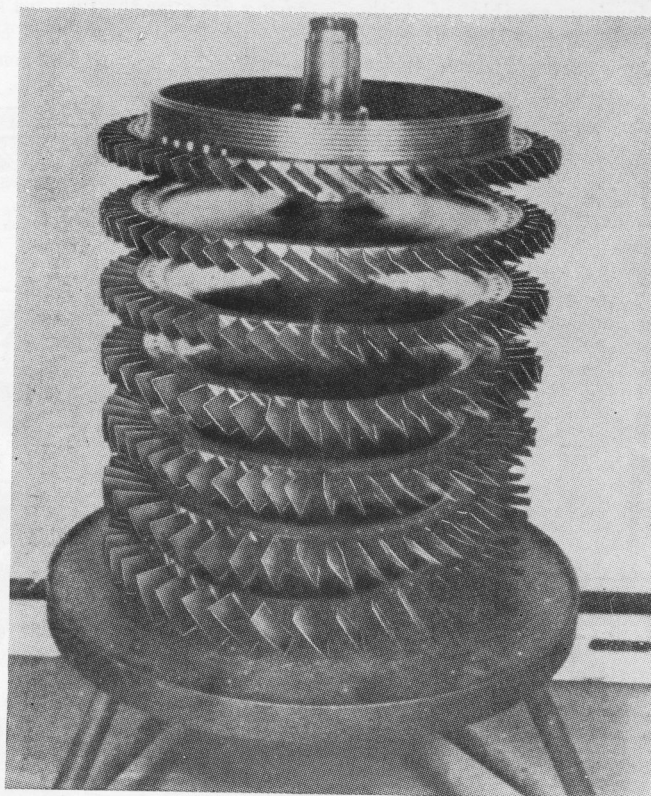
BMW-003 seven-stage axial-flow compressor assembly, last stage at the top.
